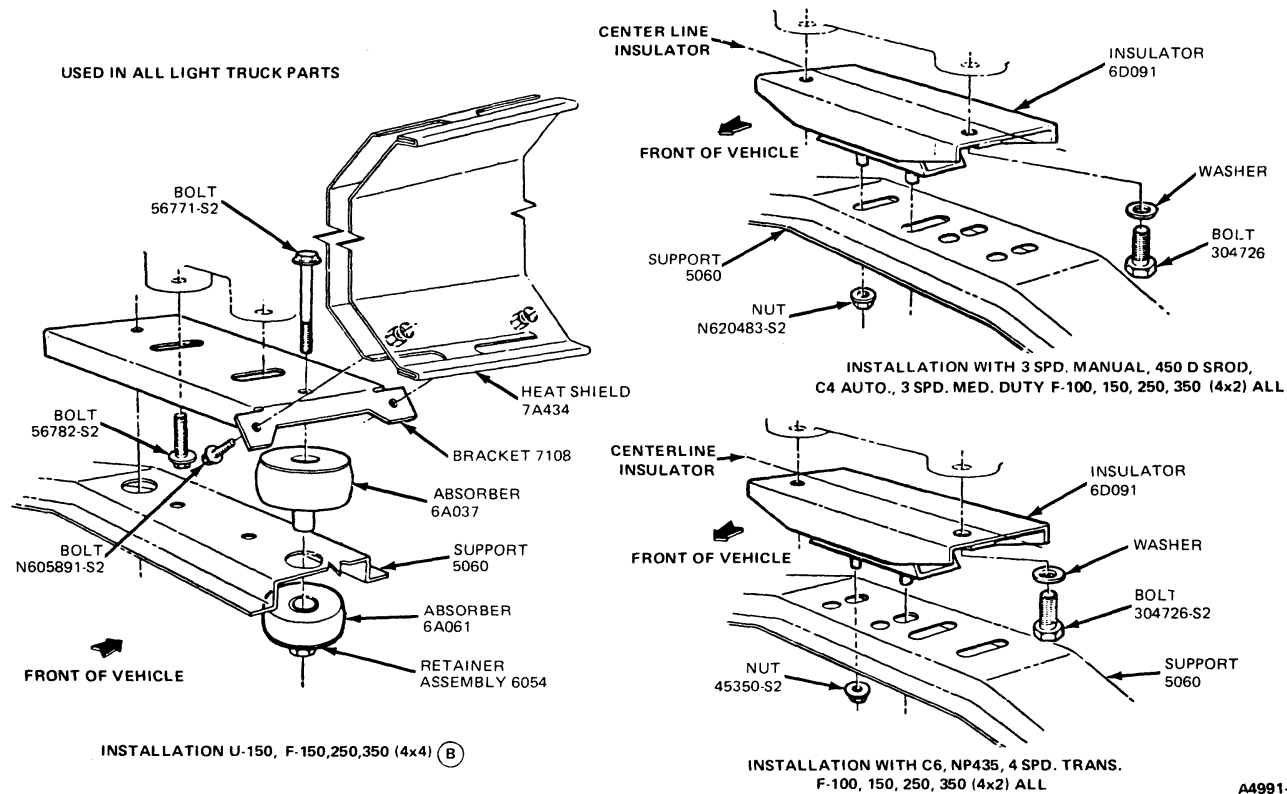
Rear Support and Insulator F-150—F-350 and Bronco
